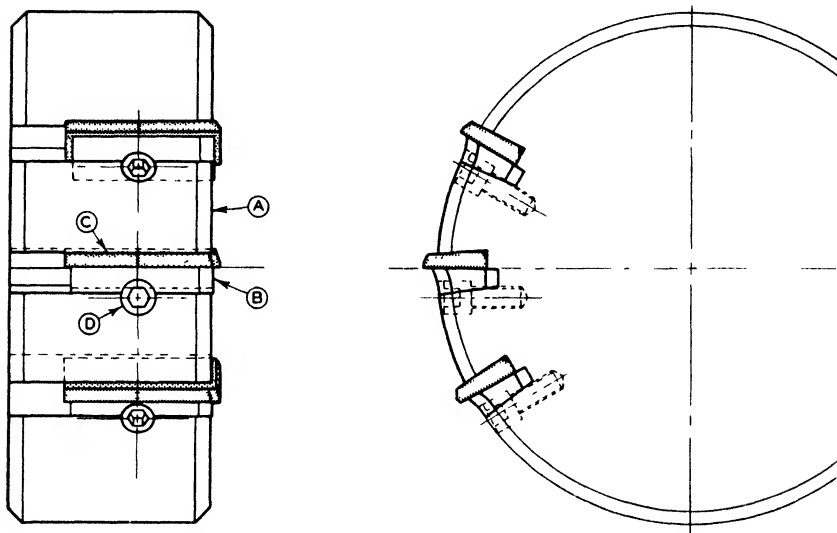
A Typical Milling Cutter Illustrating a Basic Method of Wedging Solid Carbide Tips in Place
